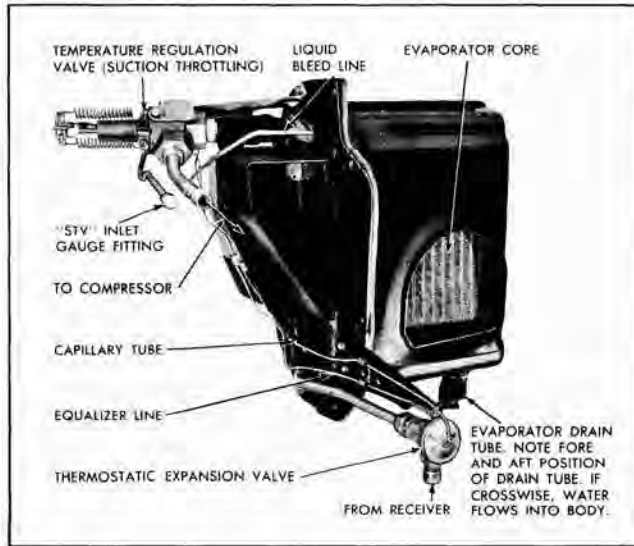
Evaporator Assembly (With Thermostatic Expansion Valve and Temperature Regulation Valve)
